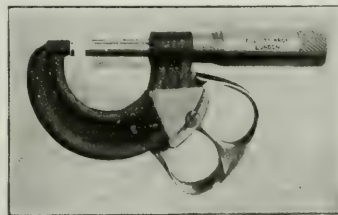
MICROMETER WITH FINGER ATTACHMENT.
